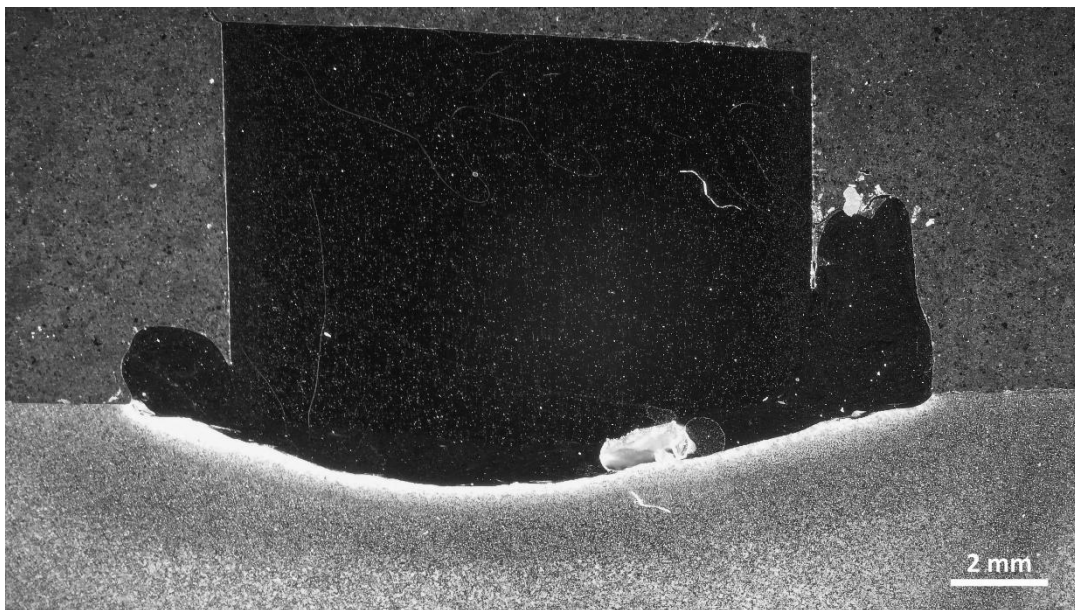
Macrostructure of the welded joint No. 4
